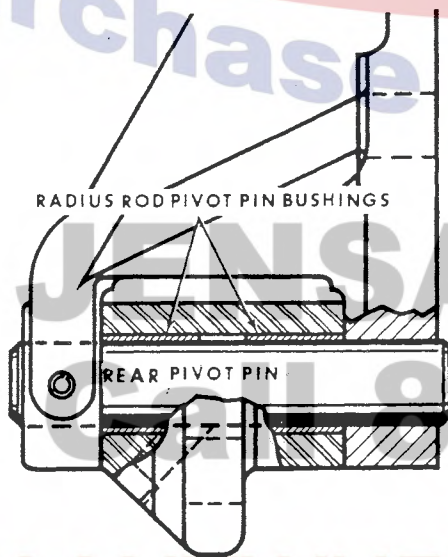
"O"-4. Adjustable Front Axle Radius Rod Pivot Pin Assemblies
